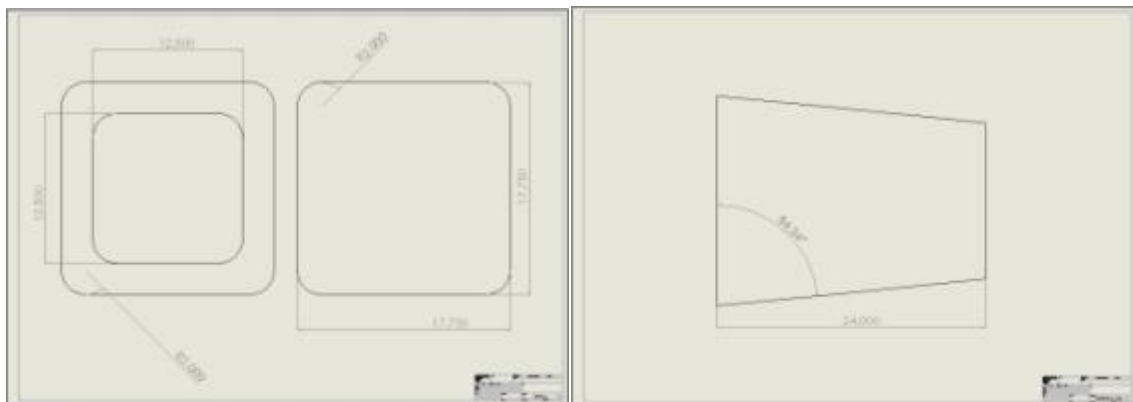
CAD drawing of tapered spar section with dimensions (Appendix C)
